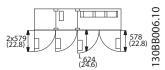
Space in front of IP21/IP54 enclosure type, frame size F4
